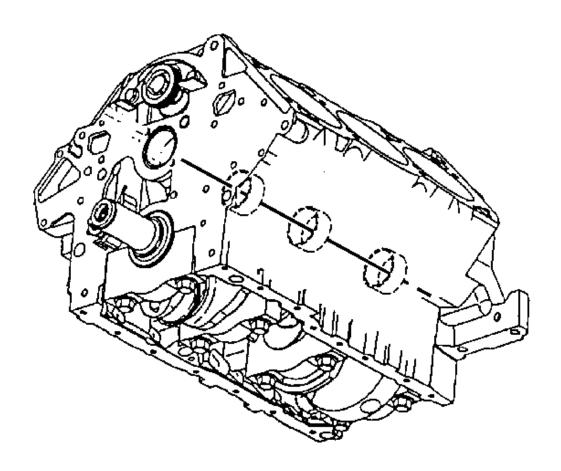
Identifying Camshaft Bearings Courtesy of GENERAL MOTORS CORP.
